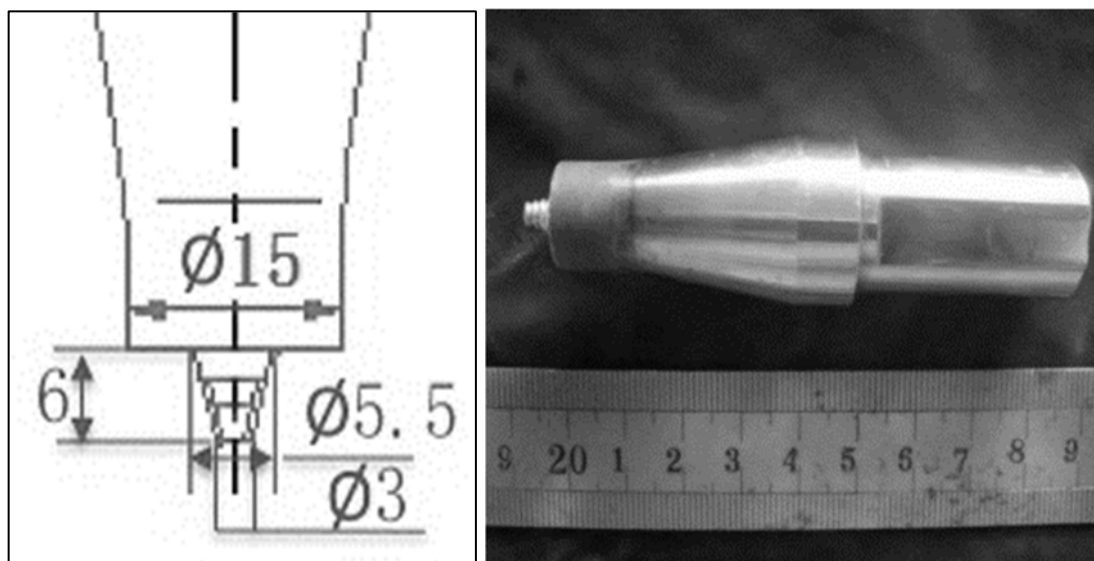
3 Sketch and photograph of the welding tool for FSW butt welding
